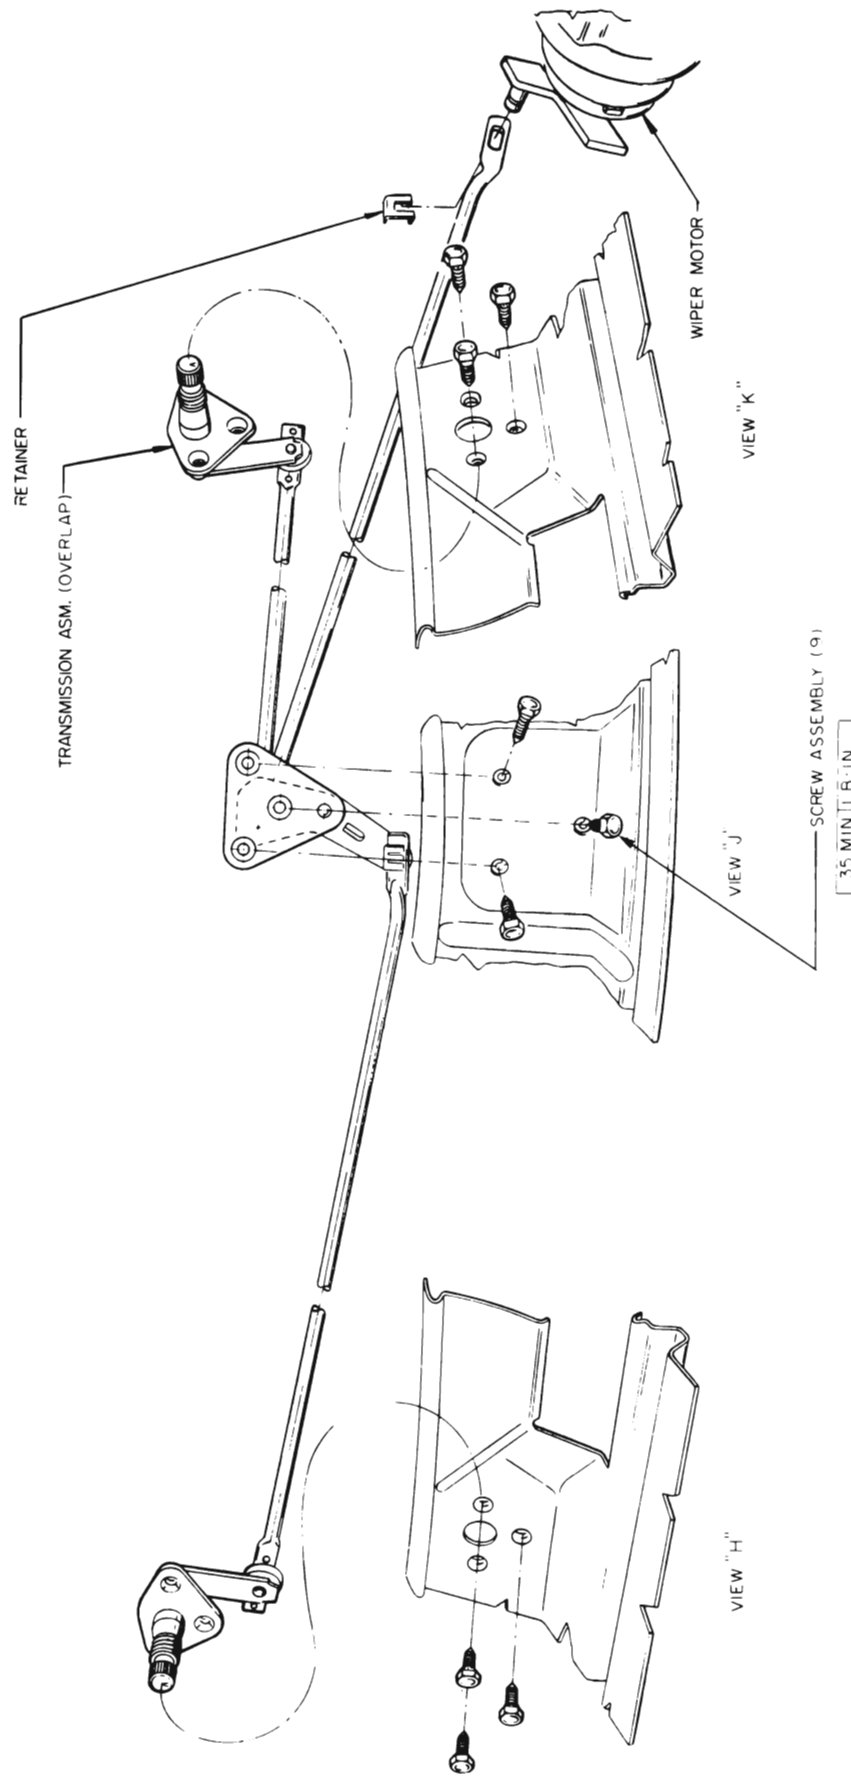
Windshield Wiper Linkage Installation - Riviera
